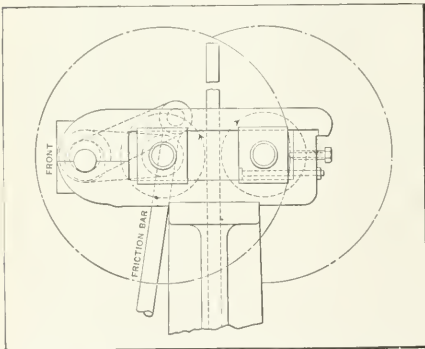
Lifting Mechanism for Drop-hammer of Latch Type
